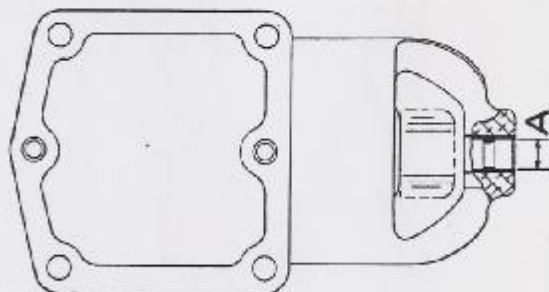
Bottom View of Starter Showing Section at End of Drive Shaft
